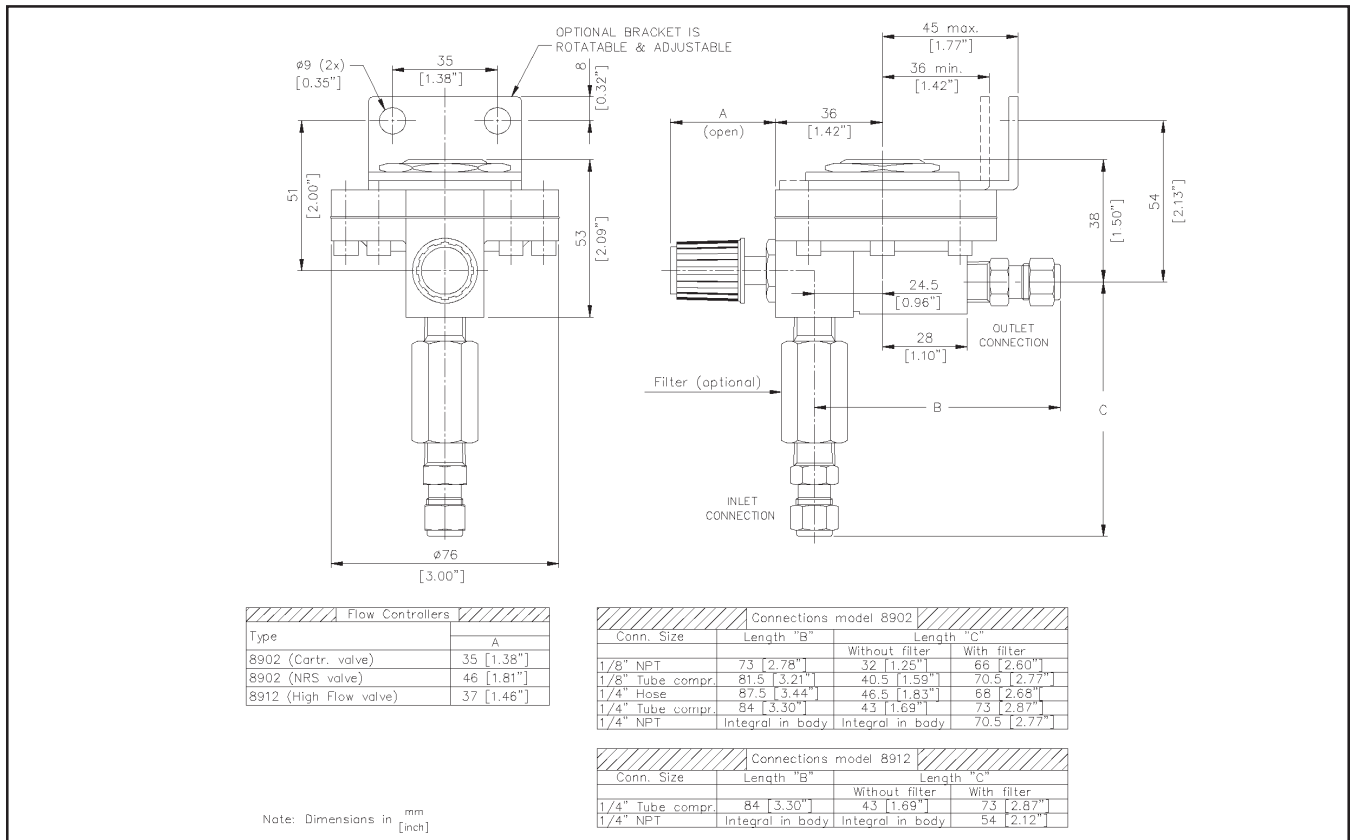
Dimensional Drawing Models FC 8902 and 8912
